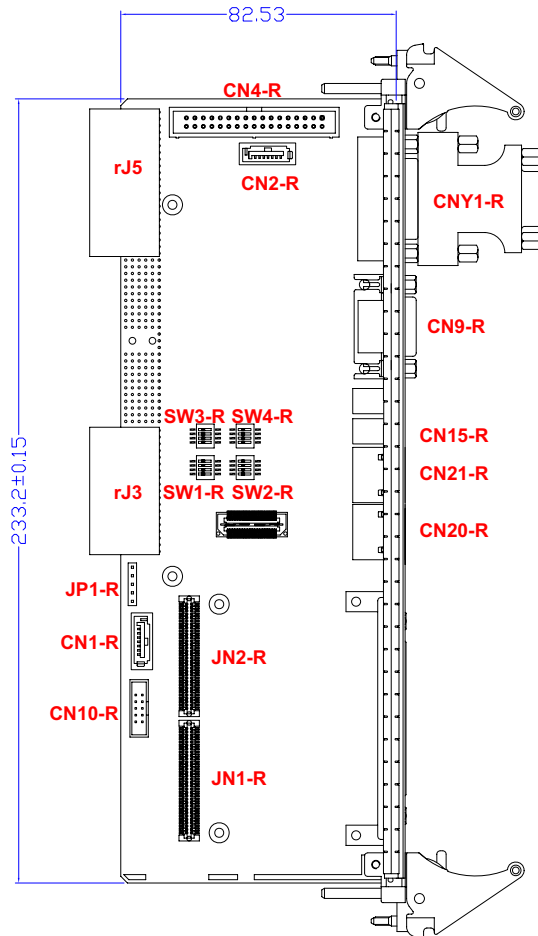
cPCI-R6000D RTM Assembly Layout
